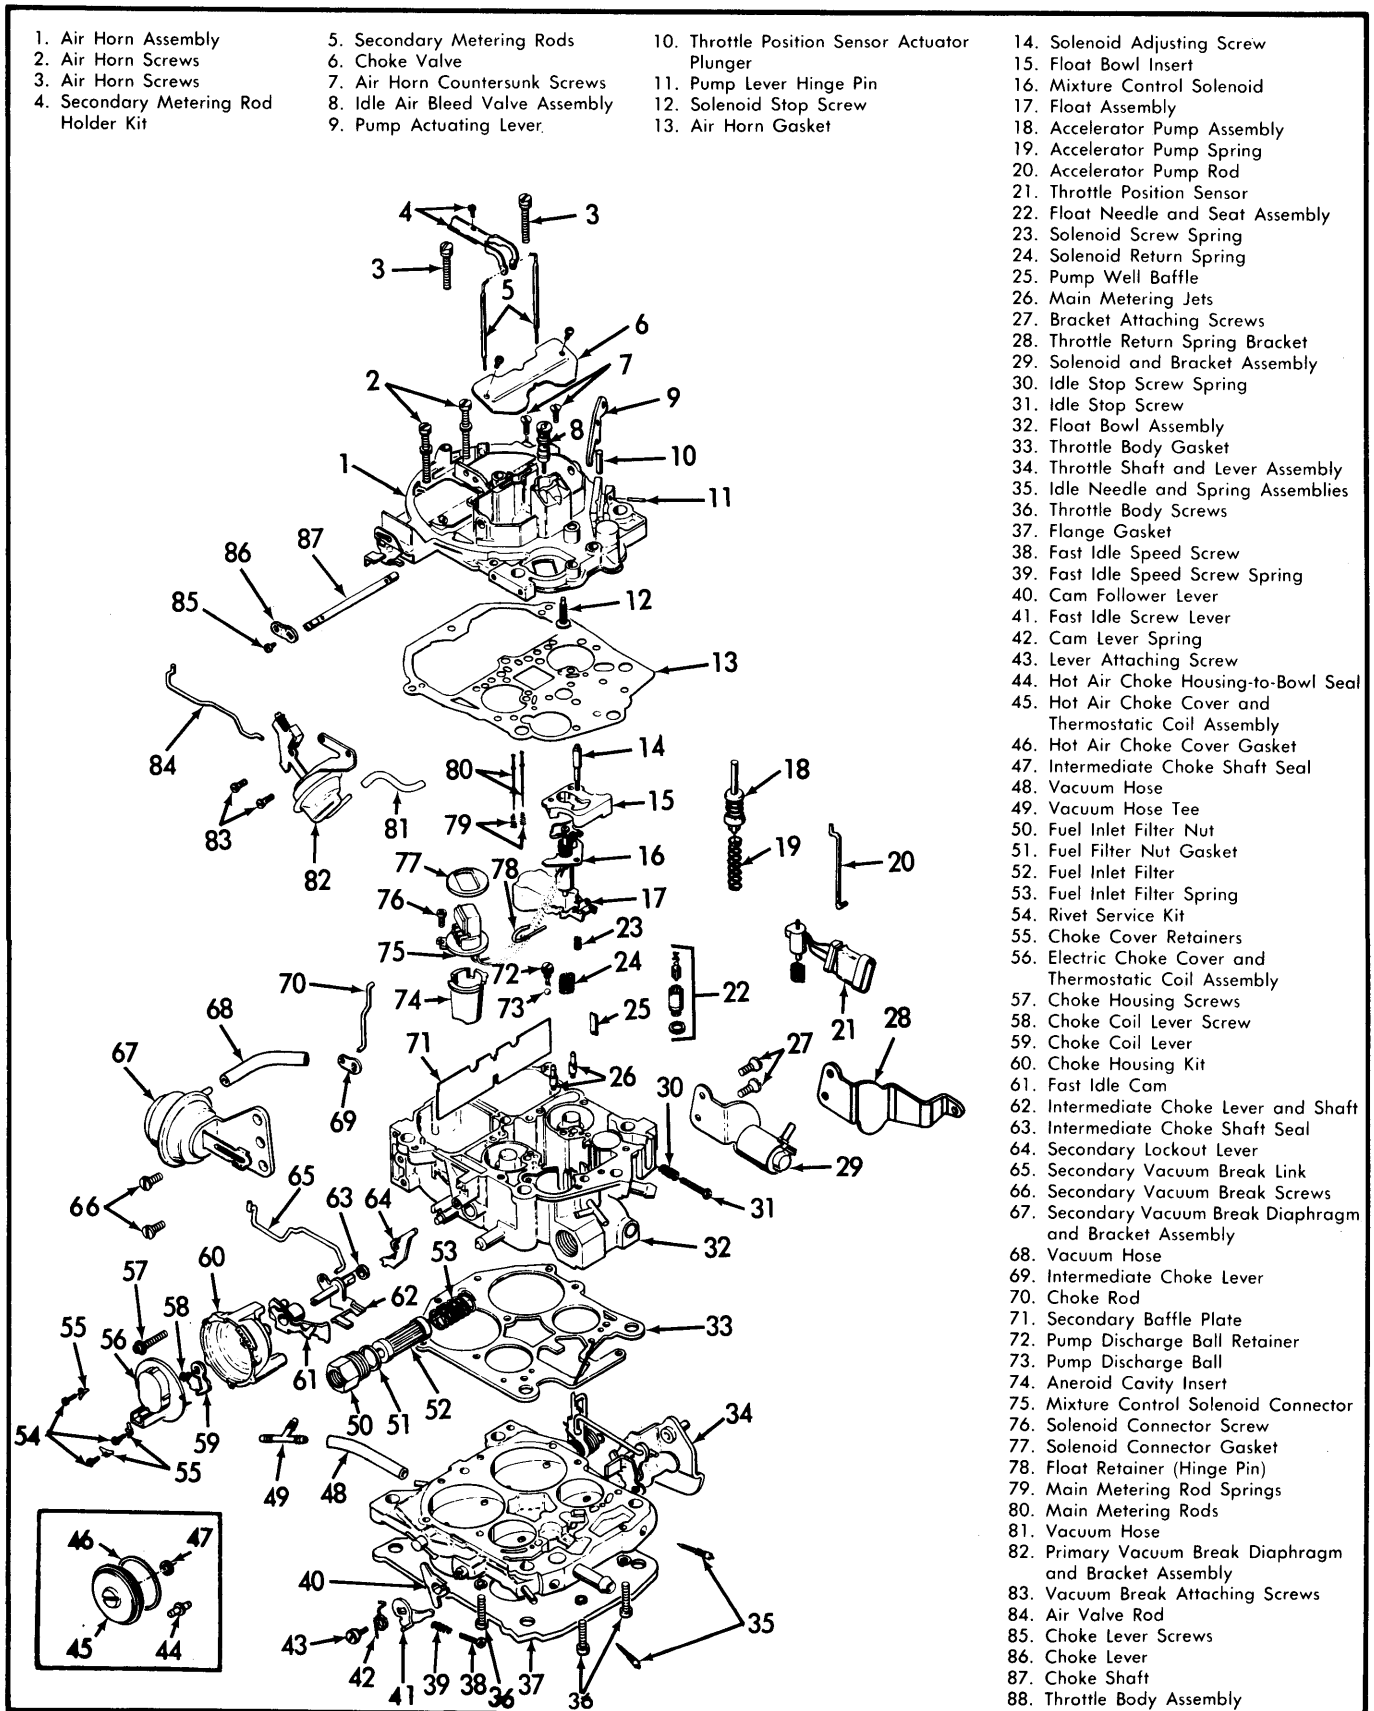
Exploded View of Rochester Model E4MC and E4ME 4-Barrel Carburetors
